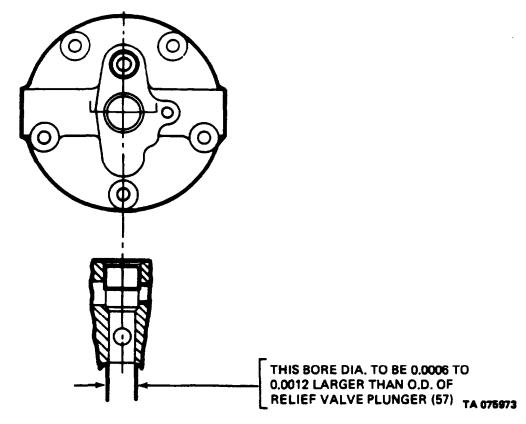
High Pressure Relief Valve Tolerance.
